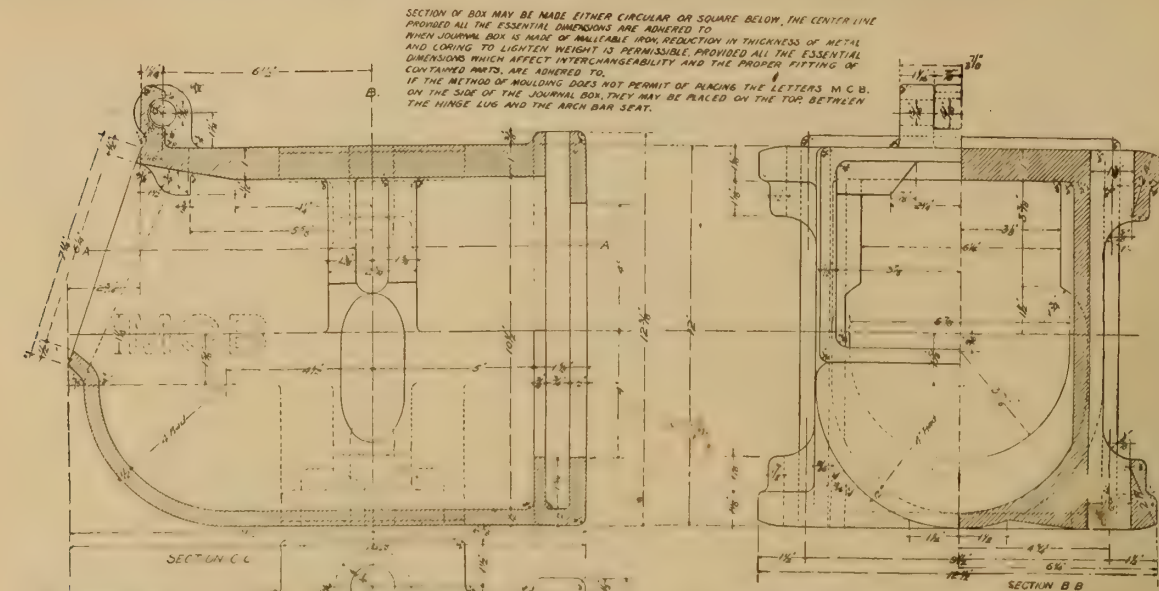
STANDARD JOURNAL BOX AND CONTAINED PARTS FOR JOURNAL 5 IN. x 9 IN. SHEET 13.
